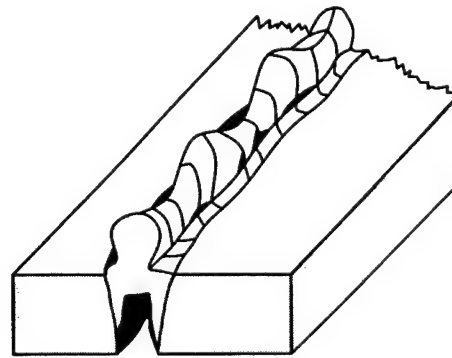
Humping phenomena in laser welding. Sketch of the weld bead based on a microscopic study.⁶
